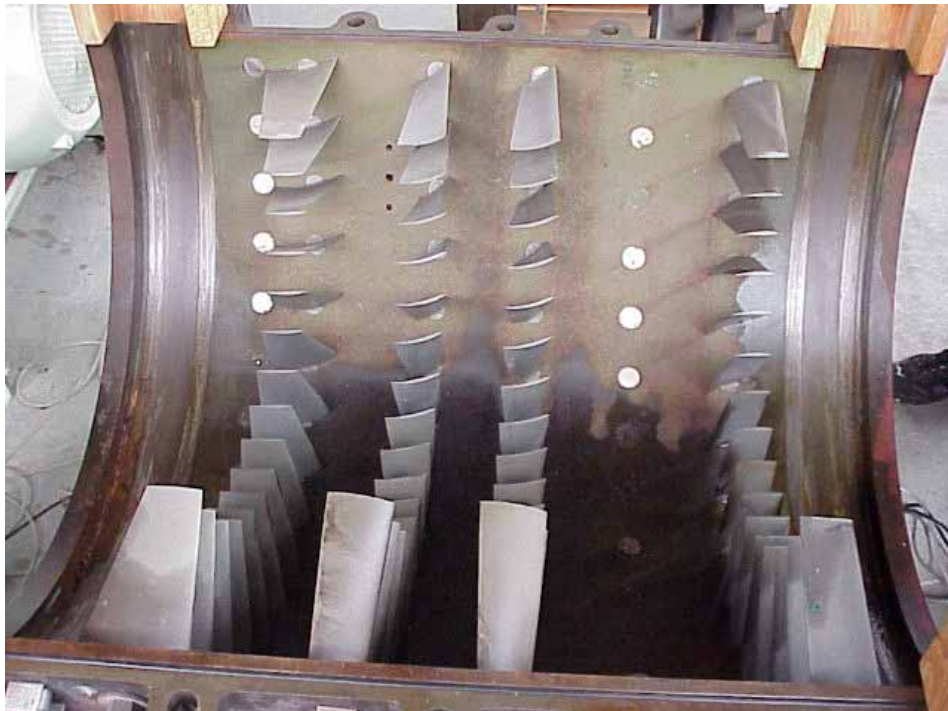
Bottom shell with smooth-cast blades: Inlet guide vanes (far right), Stator blades (middle two rows), Exit guide vanes (far left)
